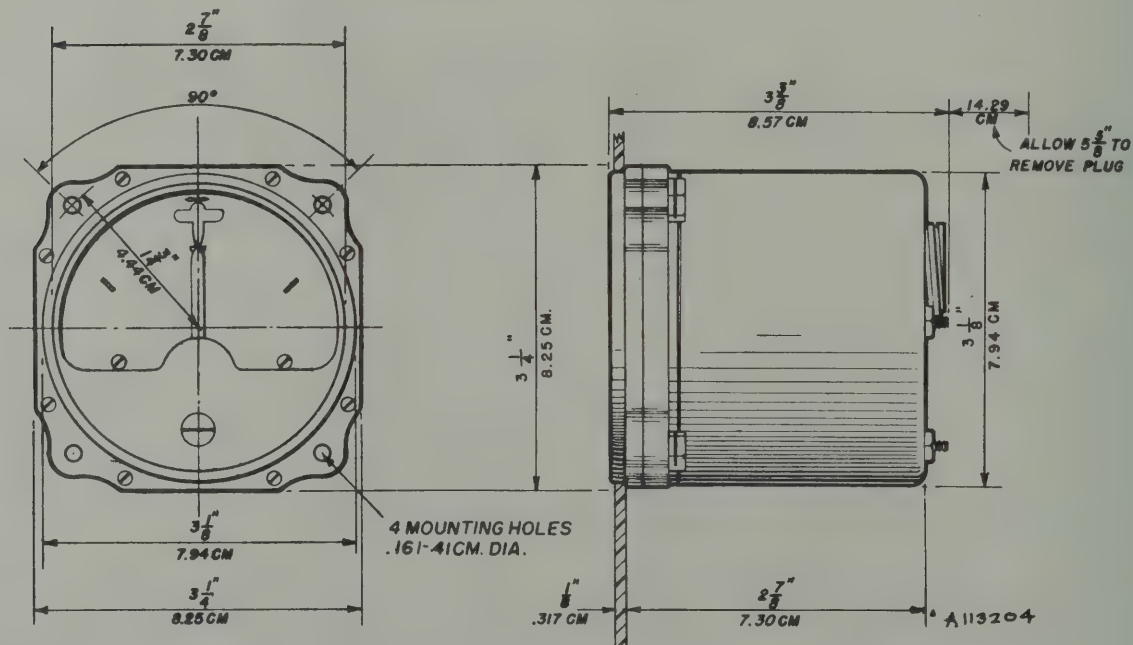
TYPE IN-4A LEFT-RIGHT INDICATOR, OUTLINE AND MOUNTING DIMENSIONS
